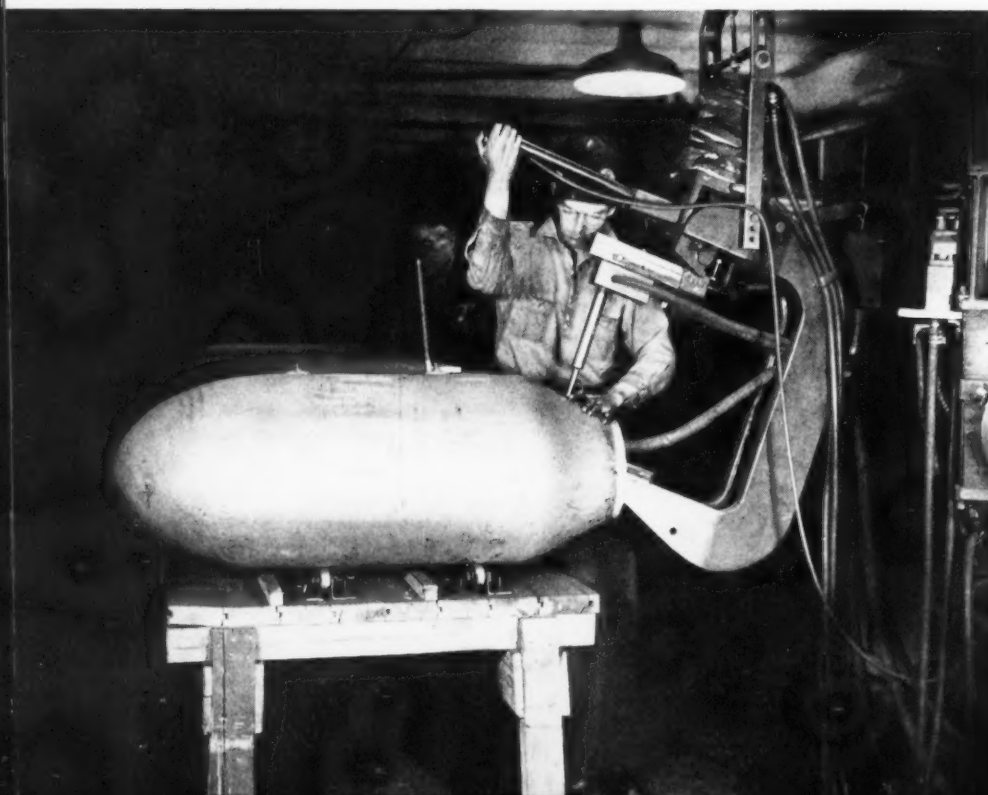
Identification Plates are Spot-welded to Tail End after the Bombs have been Shot-blasted Inside and Out
